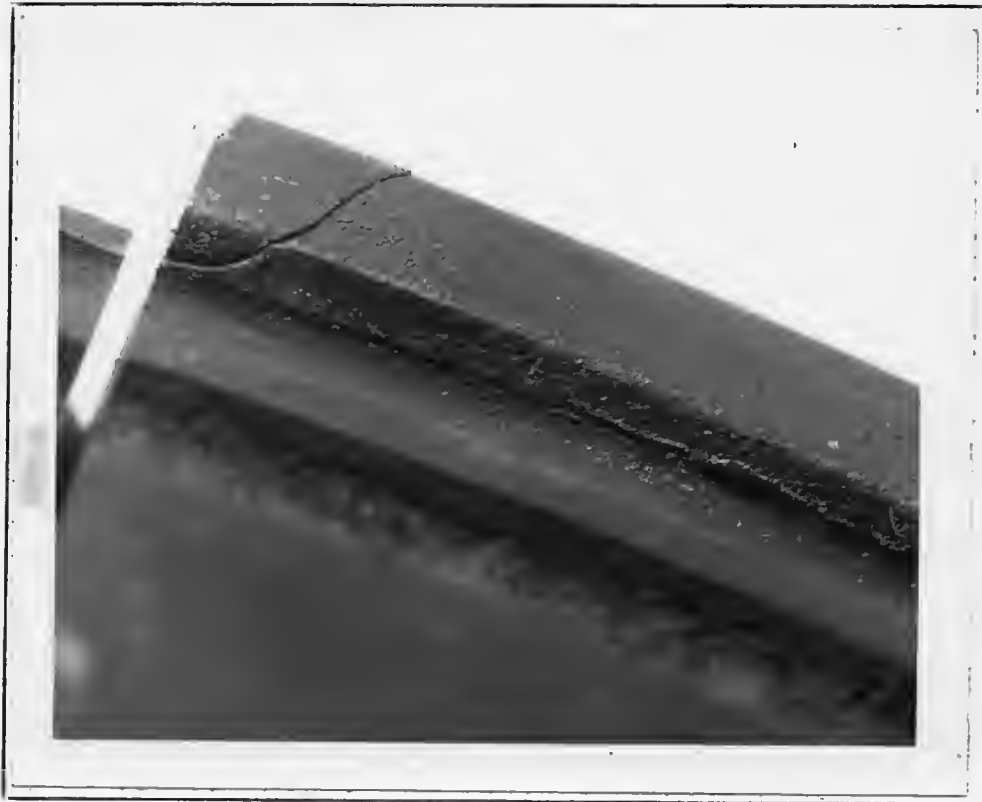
View of part of the gutter section of a rim base. The presence of a lap or seam is obvious on the gutter surface. A crack is also obvious. This crack is part of a separated surface to the left of a saw cut. The crack appears to be directly in line with the lap or seam.
